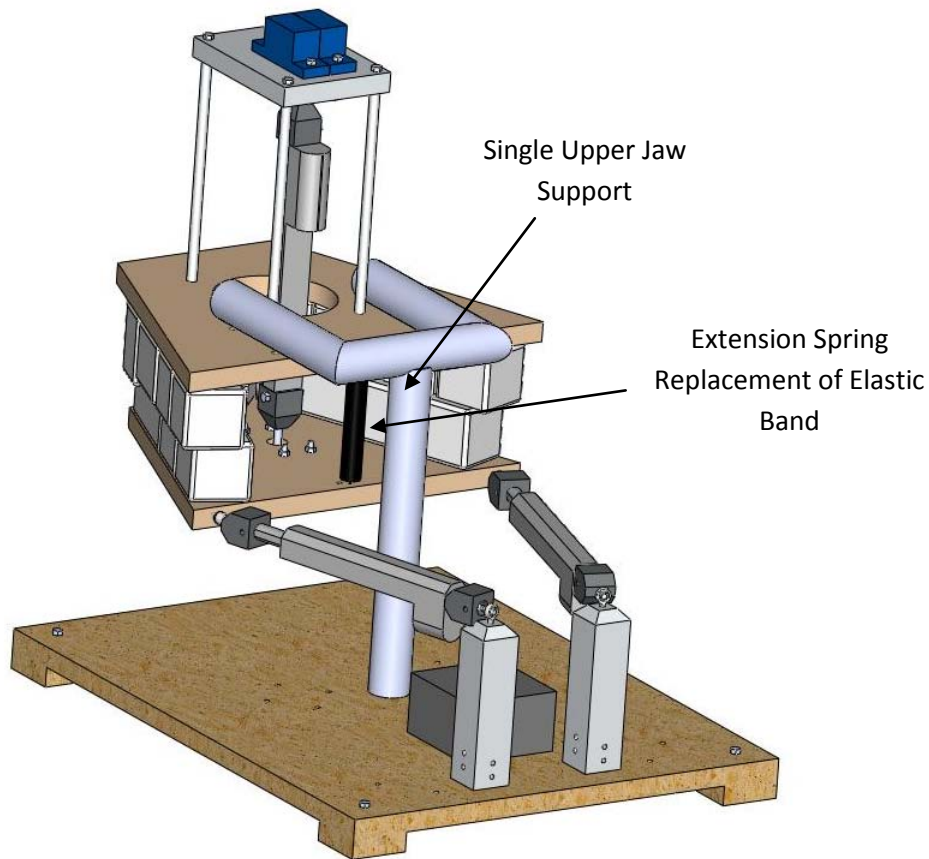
Final design isometric back view highlighting the addition of a spring support and single support stand
